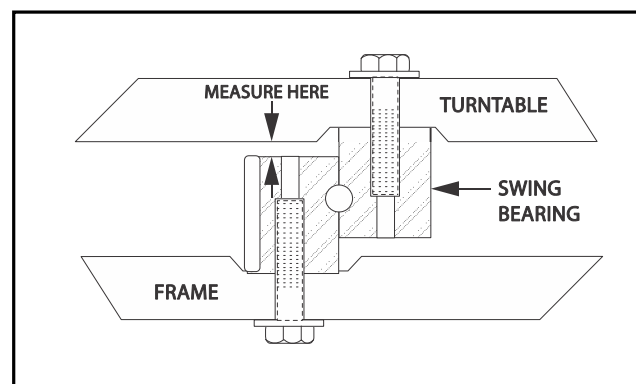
Swing Bearing Tolerance Measuring Point
